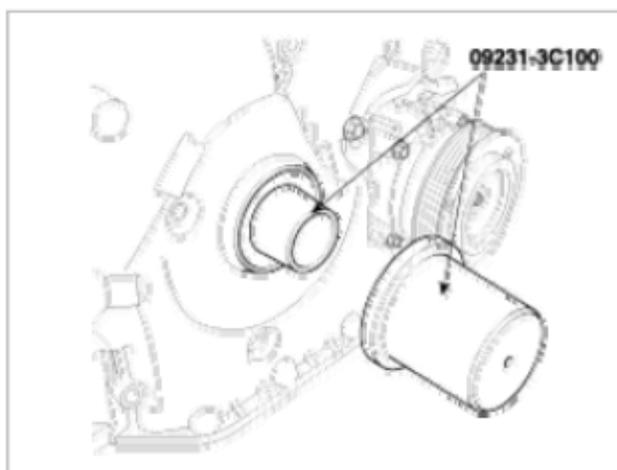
Installing Timing Chain Cover Oil Seal Using SST (09231-3C100)
